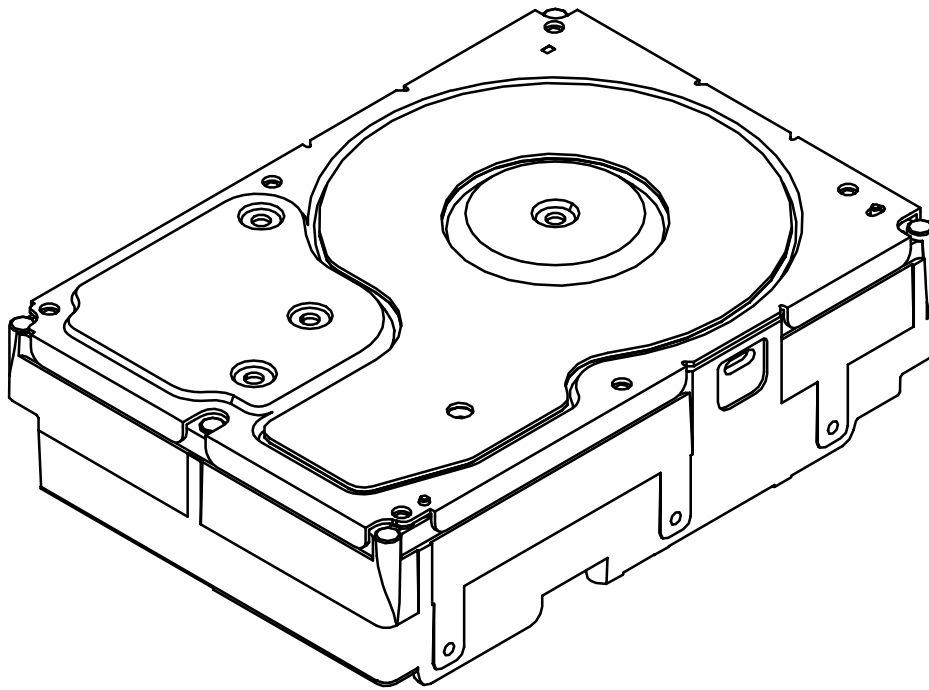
Ultrastar 9ZX Disk Drive Assembly
